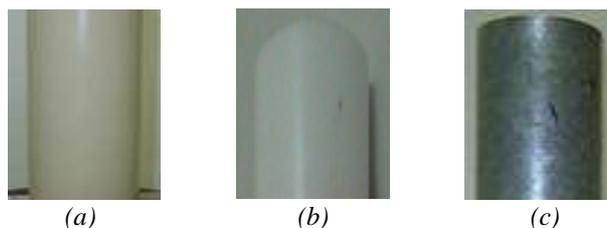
Materials used in manufacturing the mold: (a) PVC pipe, (b) teflon tube, (c) galvanized steel pipe.
